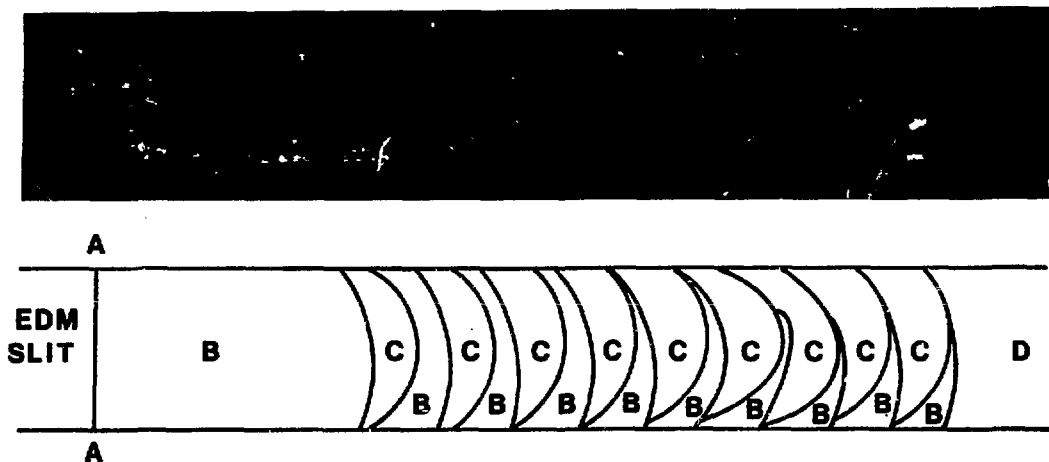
FRACTURE SURFACE IN J4/5 SHOWING TRANSITION FROM FATIGUE TO FAST FRACTURE. POINT A INDICATES ONE END OF ORIGINAL EDM SLIT, B ARE AREAS OF FATIGUE CRACK PROPAGATION AND C AND D ARE AREAS OF FAST FRACTURE
